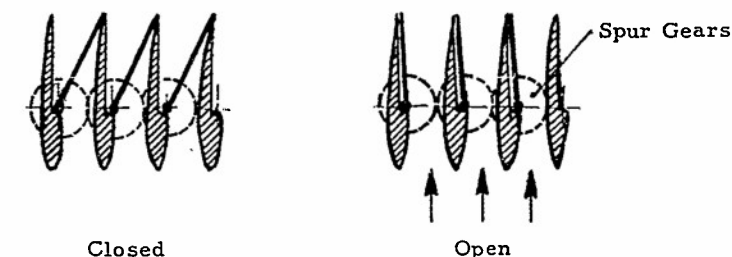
Measurement group Eisele: Controlled Spring plate valve (DFS) SCHAFFER: (Synchronized with spur gears)
